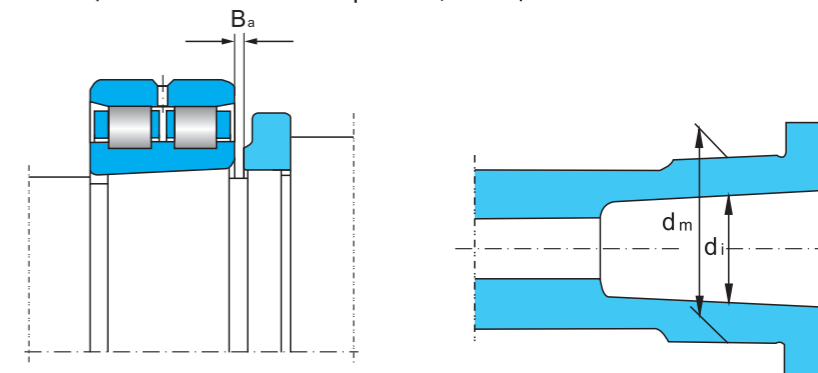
Figure for mounting cylindrical roller bearings with tapered bore
